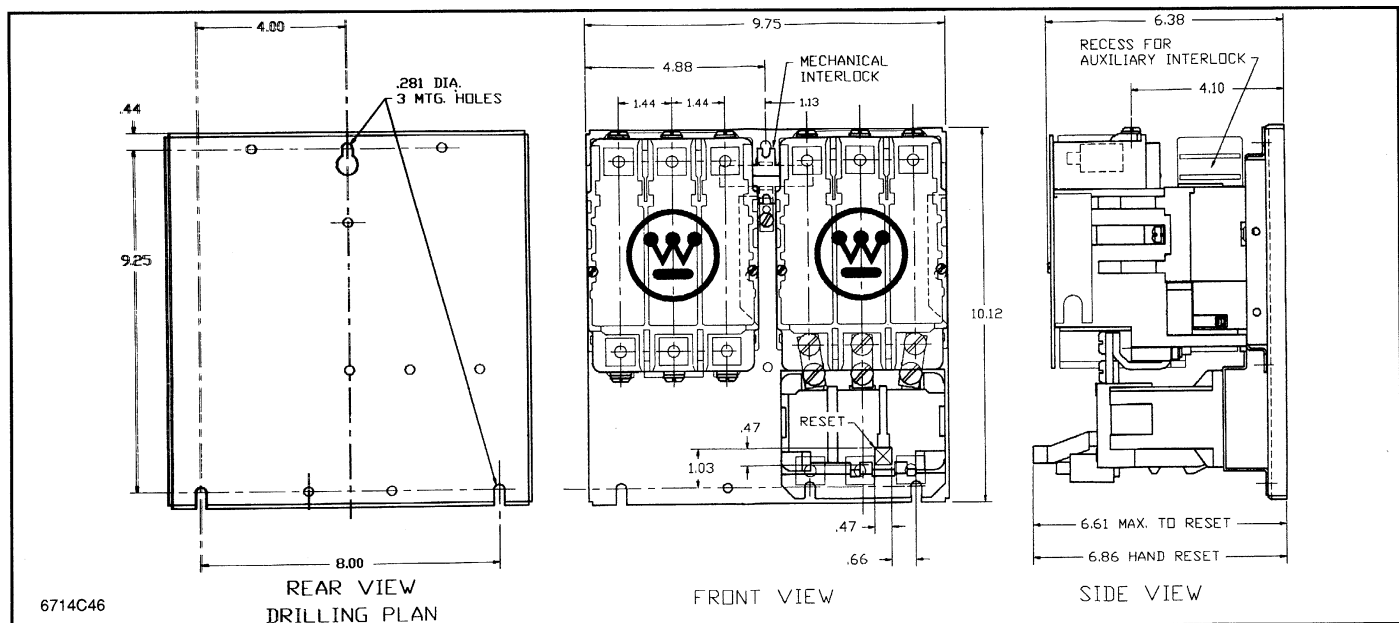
Reversing Controller (V210) Dimension Drawing (Dim. in inches)
